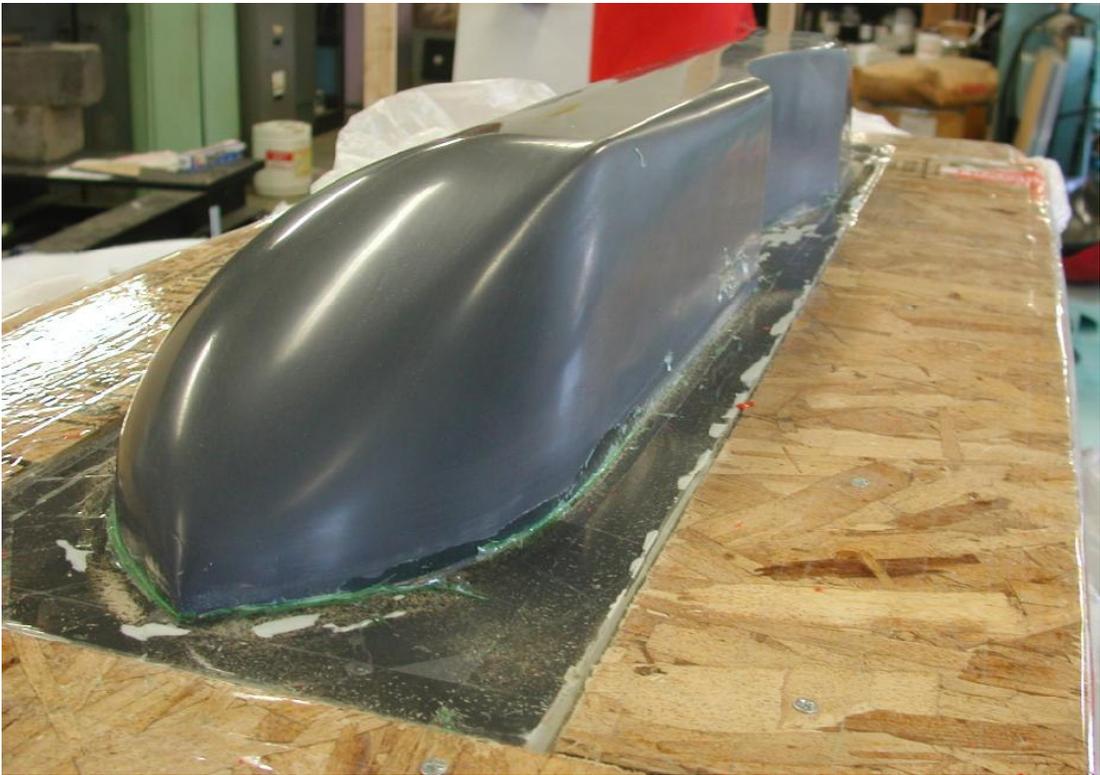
Fuselage Plug with Plywood Flange Extension.
